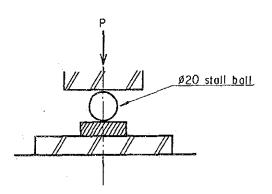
Schematic Universal Testing Machine with Jig
